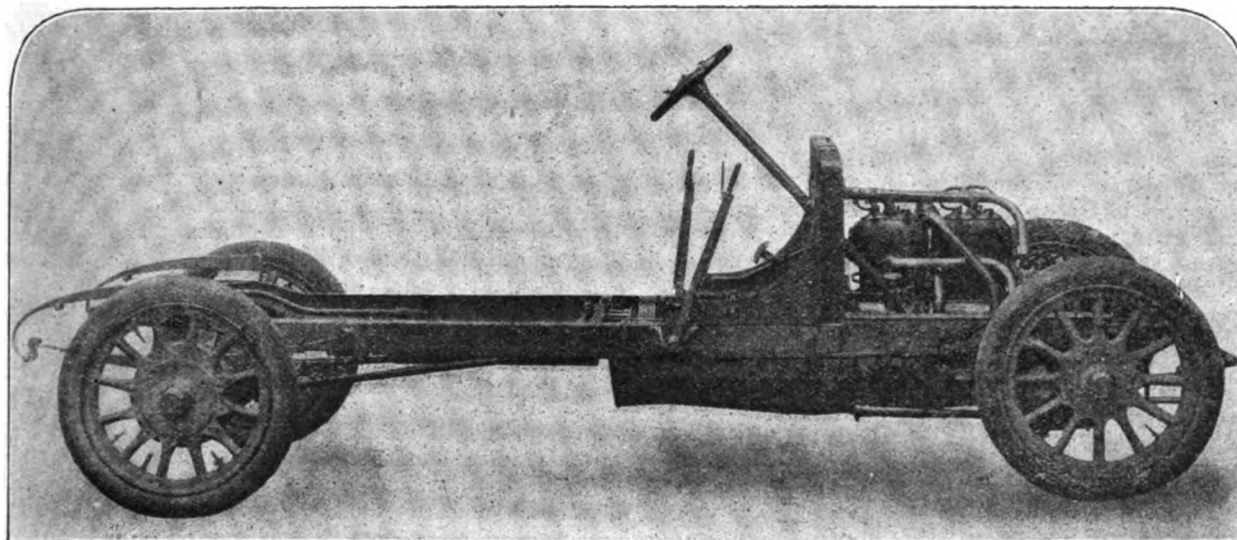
Chassis of Ariel-Simplex 20-h.p. Car.
